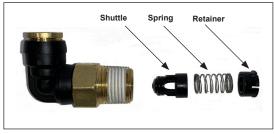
SC-3 Single Check Valve Internal Components - Spring and Shuttle
